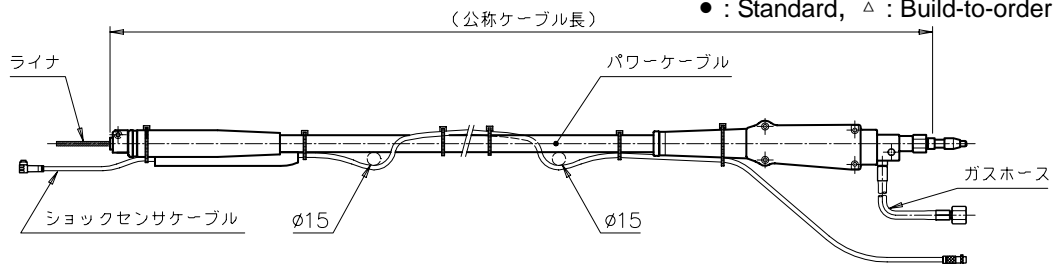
Outline drawing of the coaxial power cable (Other than V4AP)
